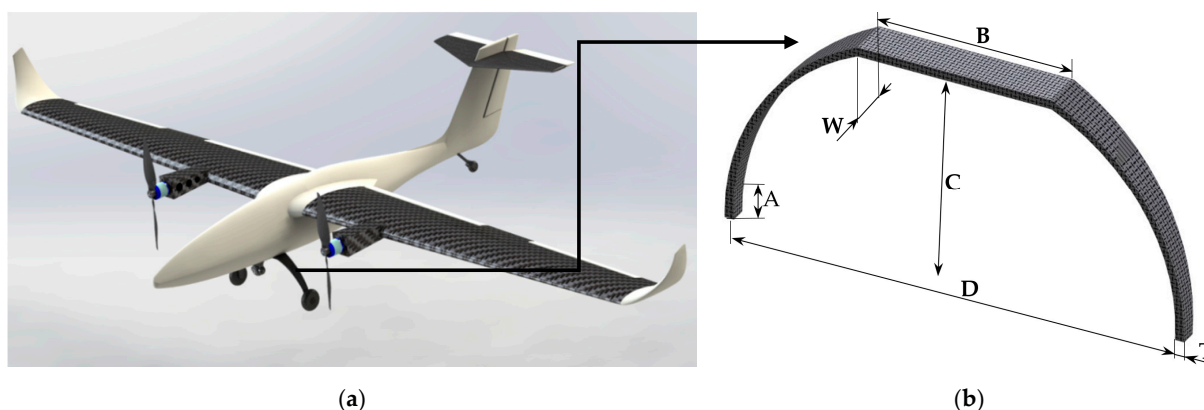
Landing gear: (a) position on the UAV; (b) dimensions.
